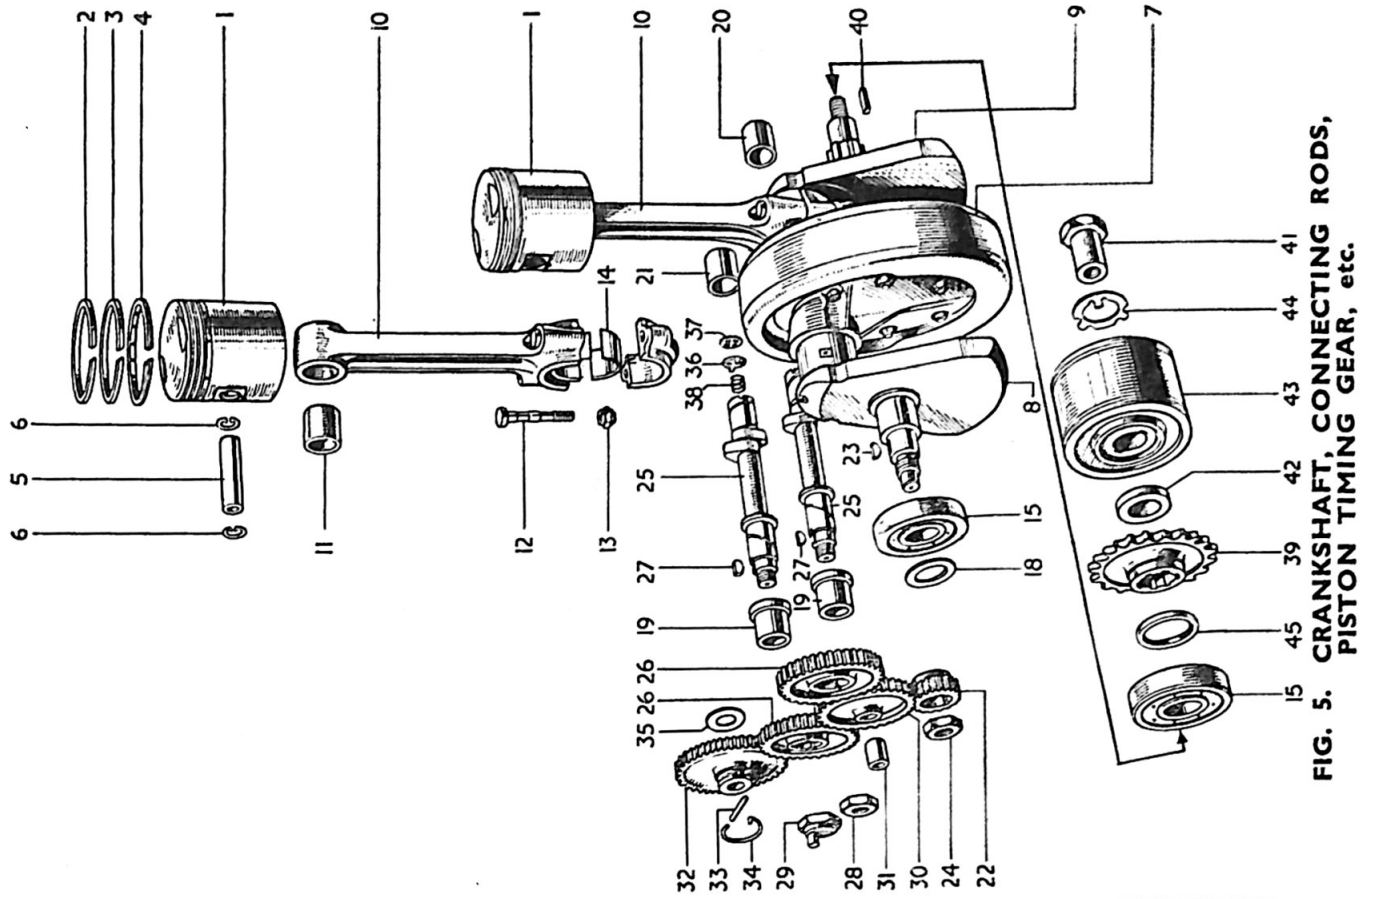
CRANKSHAFT, CONNECTING RODS, PISTON TIMING GEAR, etc.
